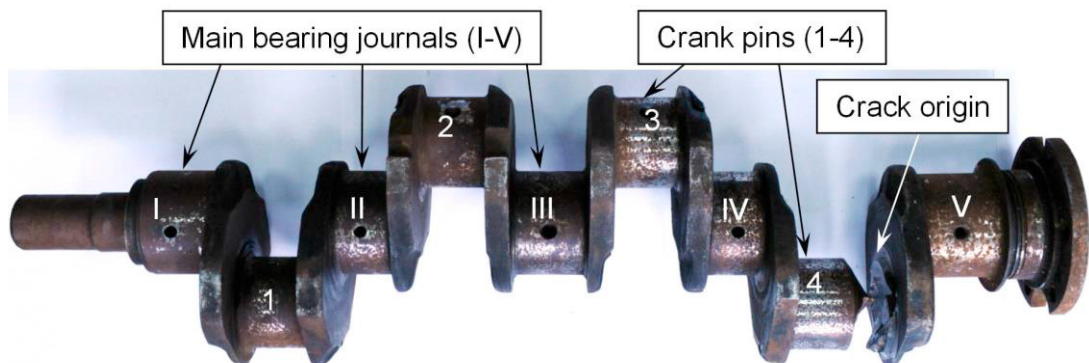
Crankshaft of S-4003 engine after failure.
